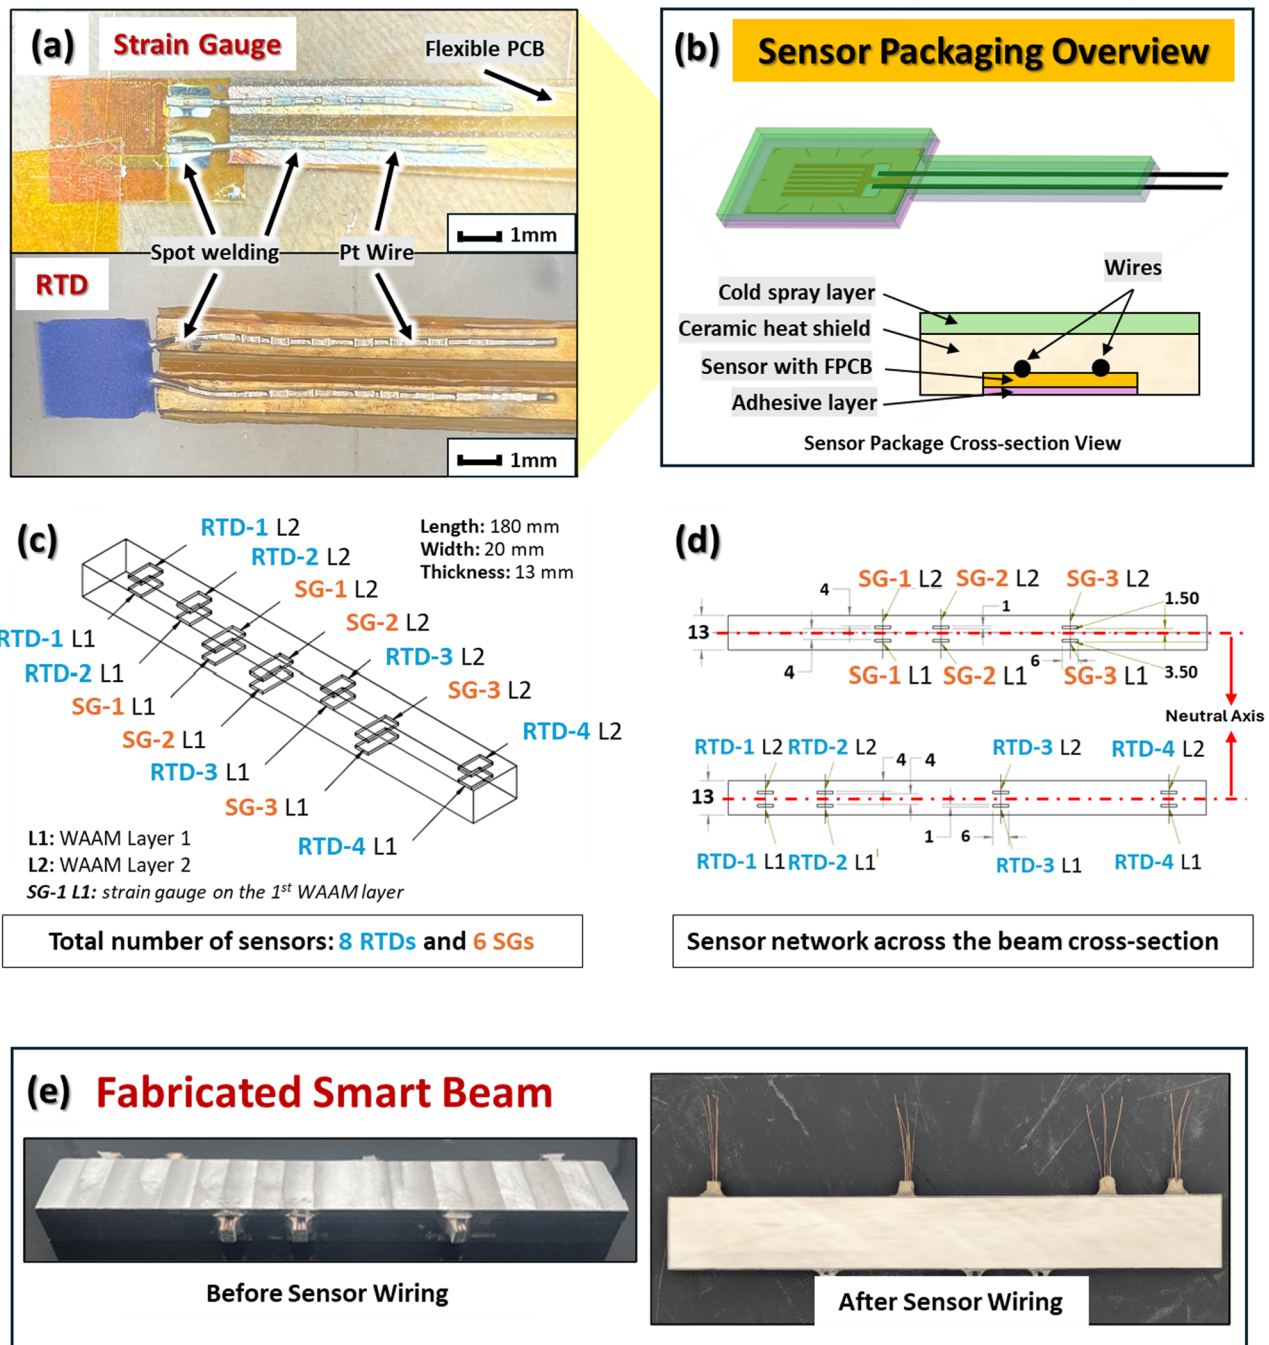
Sensor packaging and smart beam design: a Representative images of the SG (top) and RTD (bottom) sensors with FPCB packaging; b Schematic overview of sensor packaging within the metallic structure; c Smart beam design featuring two layers of sensor networks
